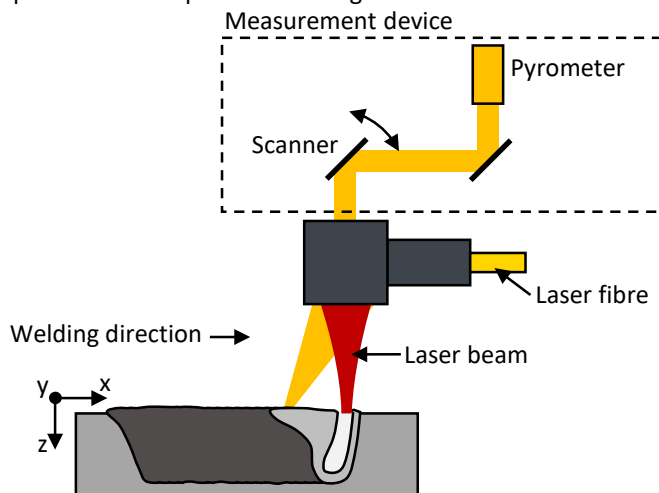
Schematic view of the experimental setup with a longitudinal section of the laser beam welding process, the welding direction, the laser beam, the laser fiber, and the self-built measurement device, which was connected to the laser optics.
